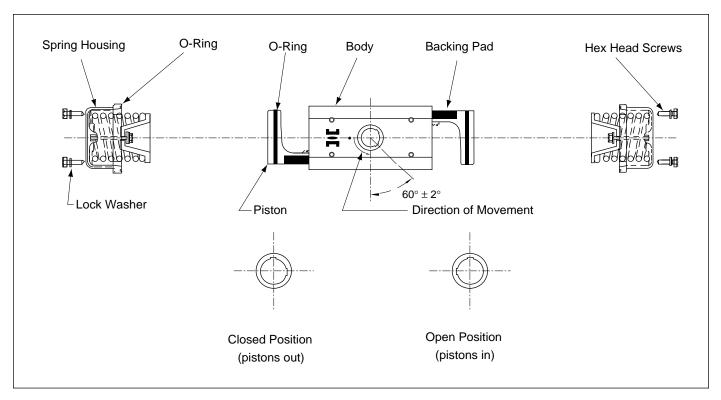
Top view of (Fail Open) Single Acting Actuator Assembly - Models 003-036
